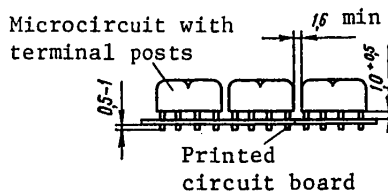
Assembly of microcircuits with terminal posts on a printed circuit board.
